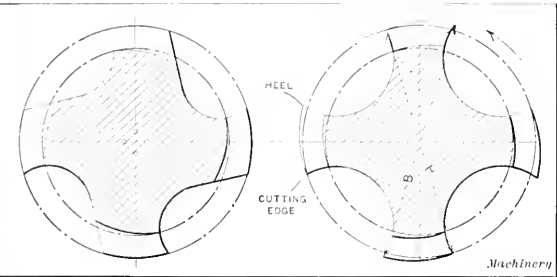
Cross-section of Tap relieved in the Angle but not on the Top of Thread. Fig. 4. Tap not relieved, warped in hardening so Diameter over Heel is Larger than over Cutting Edge
